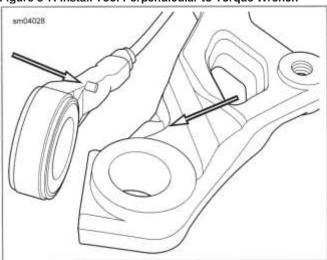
Rear Wheel Speed Sensor Index Pin (ABS Equipped)
